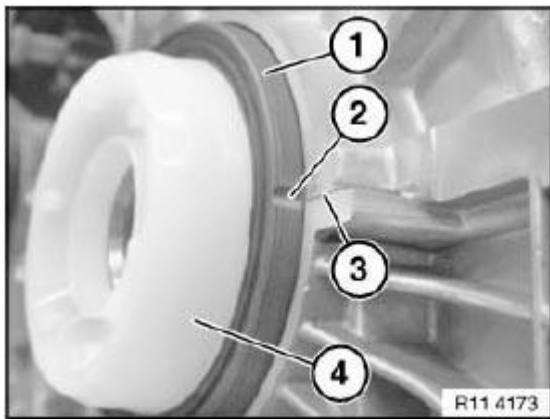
Support Bushing, Crankshaft Radial Seal With Groove And Housing Partition
